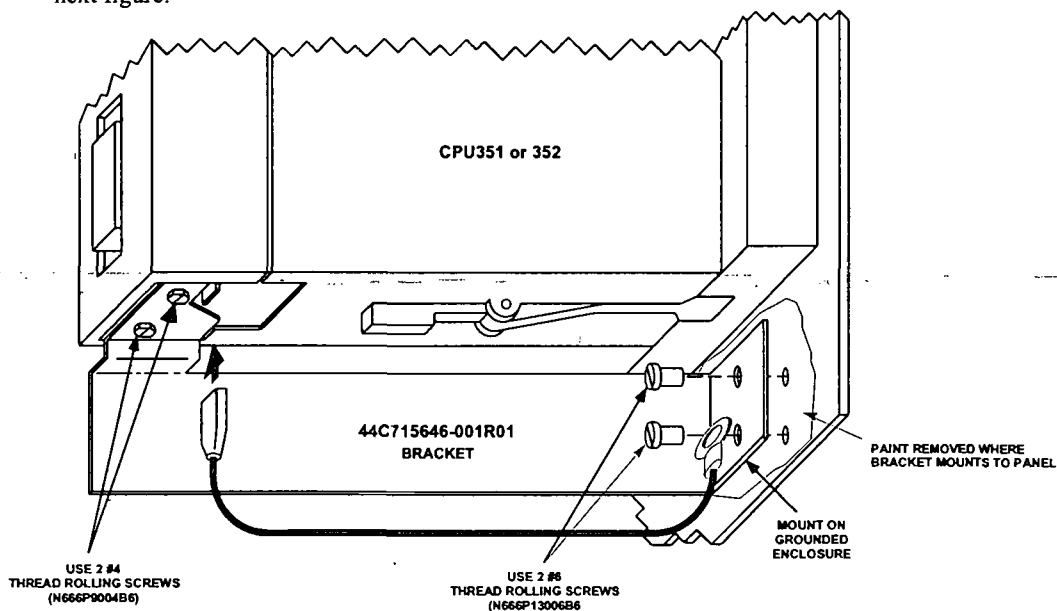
CPU 351 or 352 - Mounting the Shield Grounding Bracket and Wire
